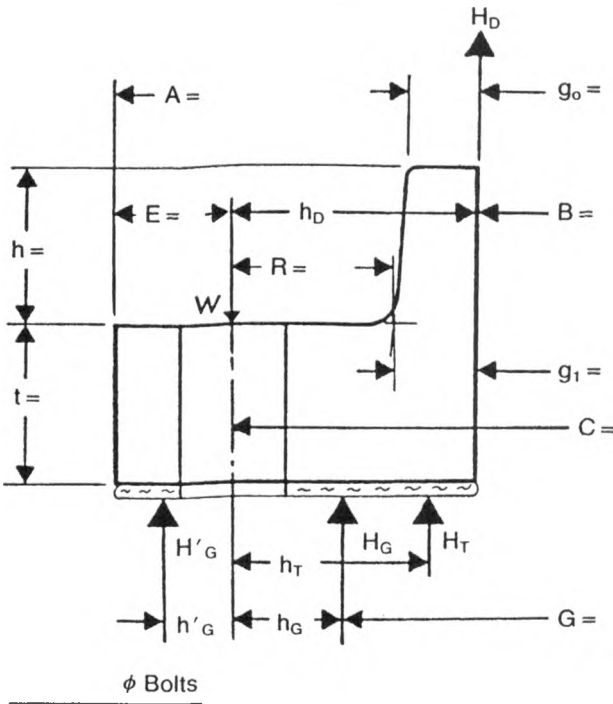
Dimensional data and forces for a slip-on flange, flat face, full gasket.
